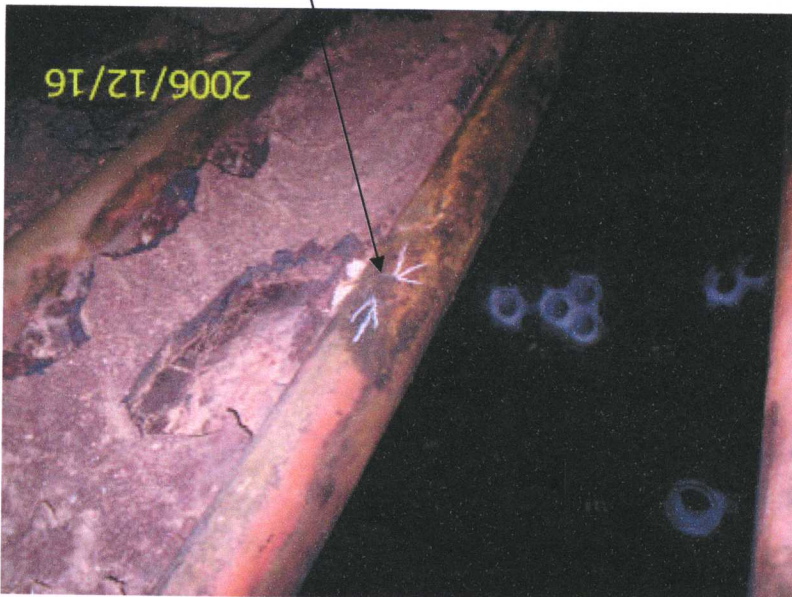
Barrel angle ring/ smokebox tubeplate RHS
